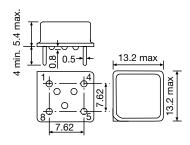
ECS-2100 Series — Side, Bottom and Top views
